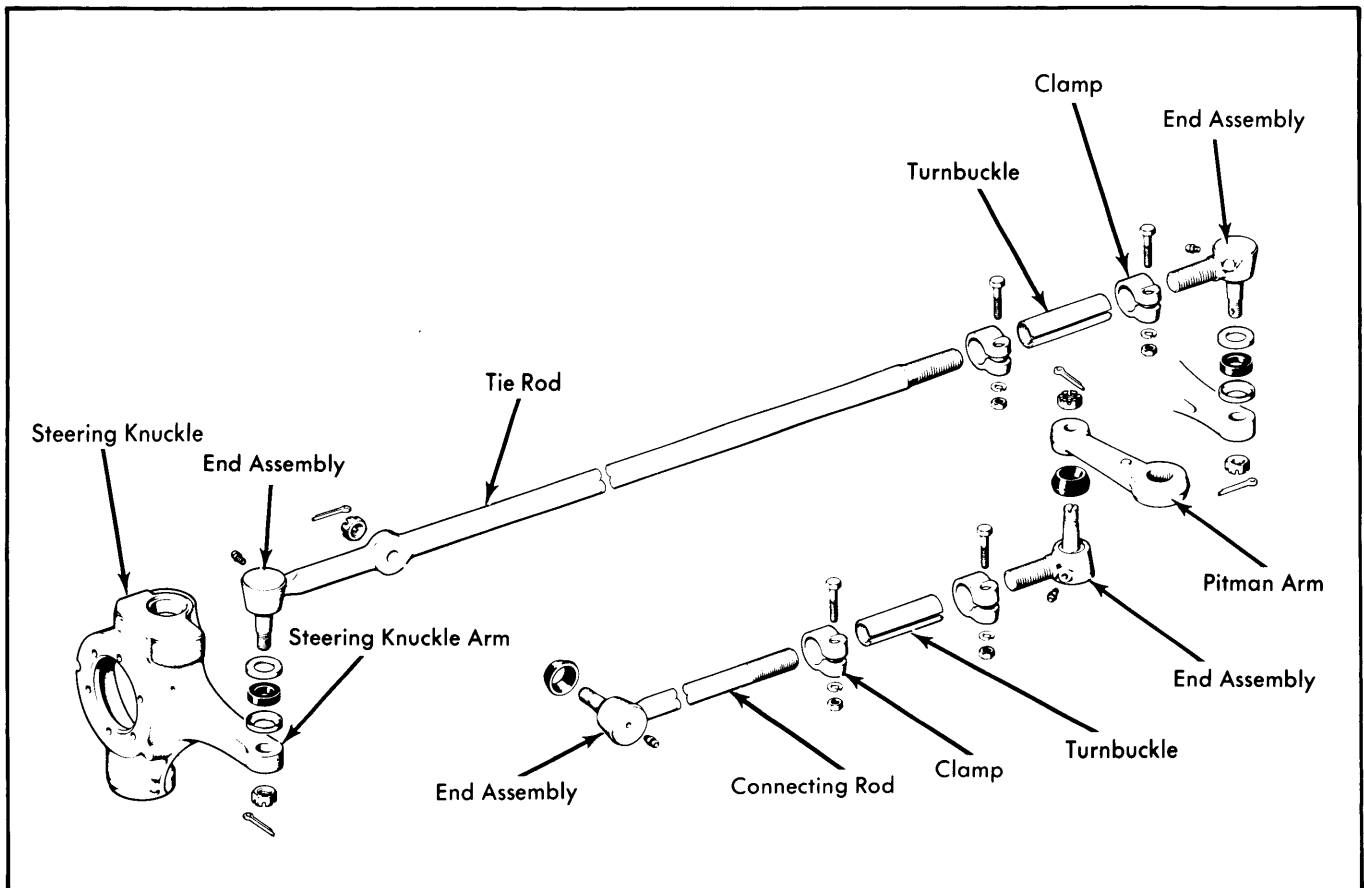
Disassembled View Of Steering Linkage (Cherokee, Wagoneer & Truck Models Shown)
